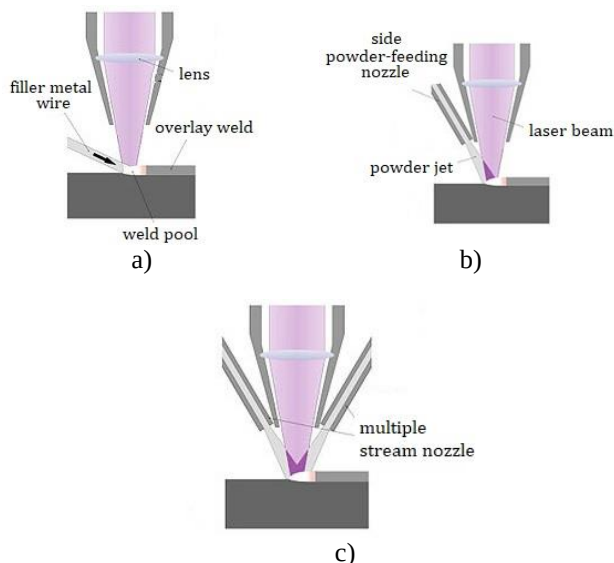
Variants of the laser deposition process: a) laser deposition with the filler material in the form of a wire, b) laser metal deposition with the side powder-feeding nozzle and c) laser deposition with the multiple stream nozzle
